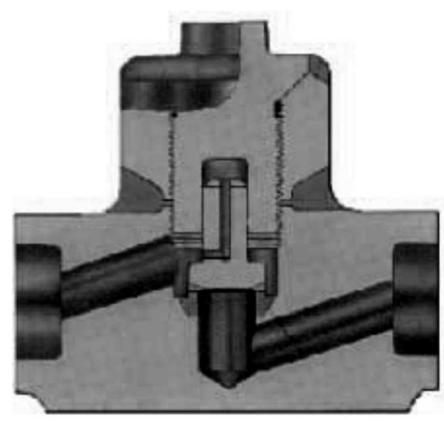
Cross section of Body Yoke Weld joint
